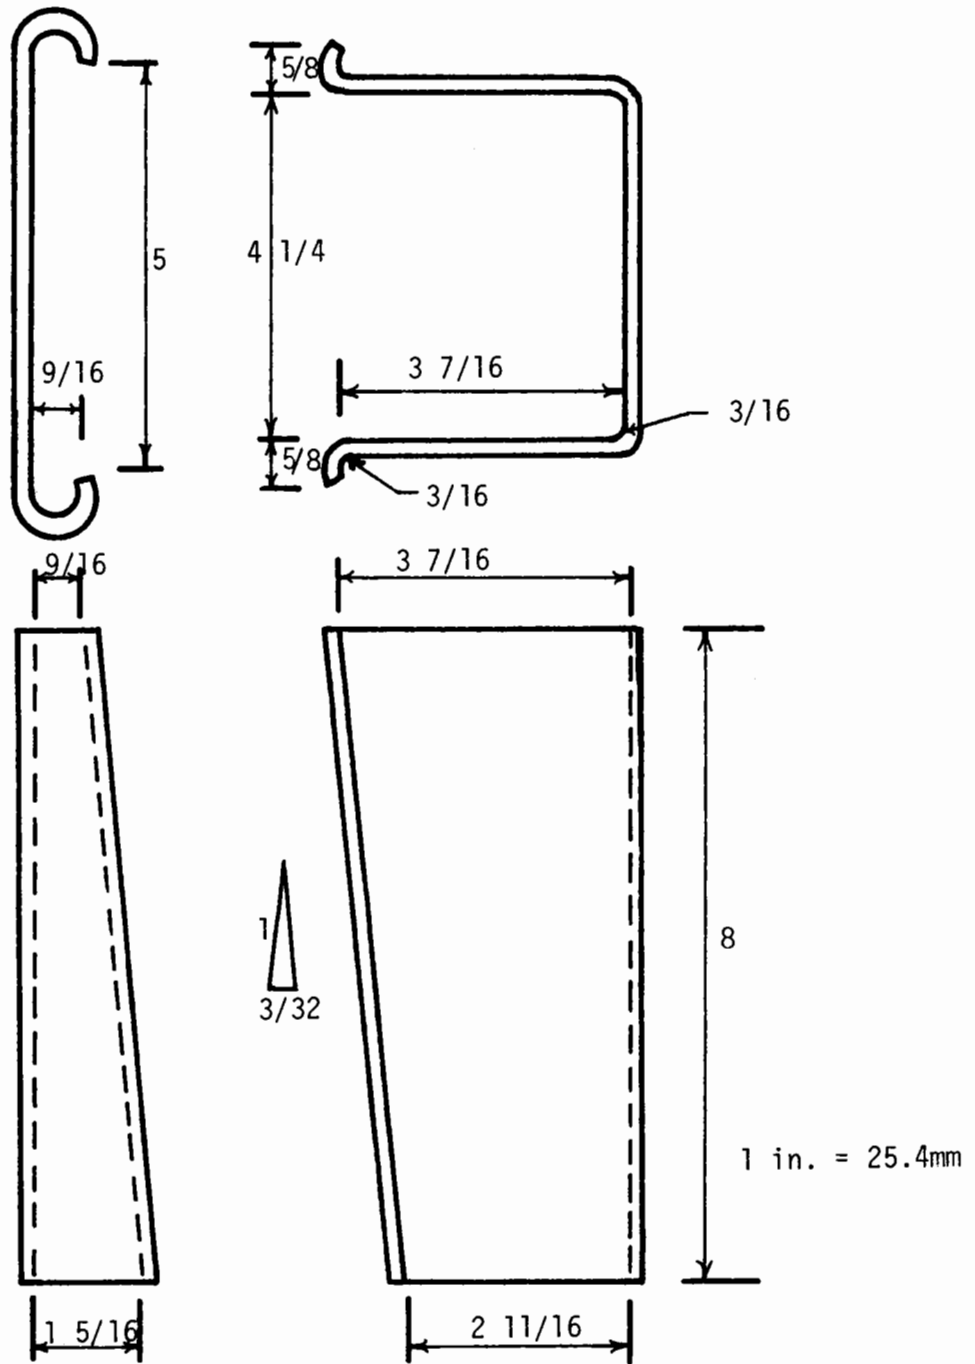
SUGGESTED SPLIT-SLEEVE CONNECTOR FOR 4x4x1/4 BOX SECTION
